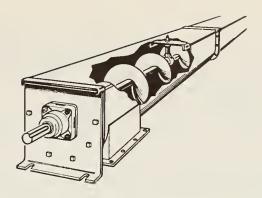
Typical screw conveyor. Source: Screw conveyor engineering catalog no. 7700.
